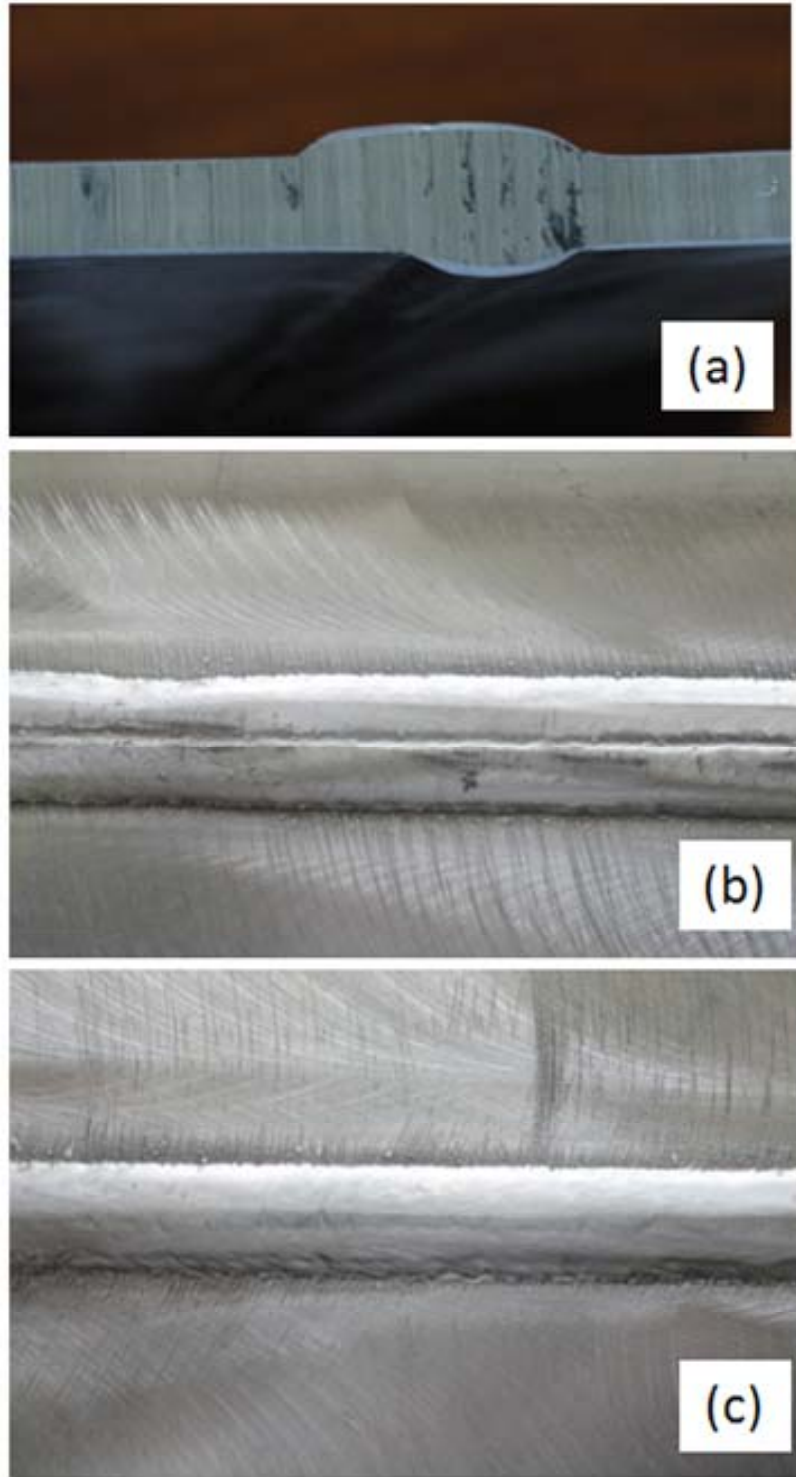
Welded Material (a) side view (b) top view and (c) side view.
